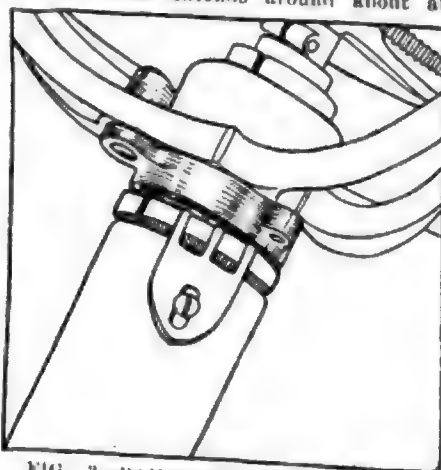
RAMBLER STEERING GEAR ADJUSTMENT
